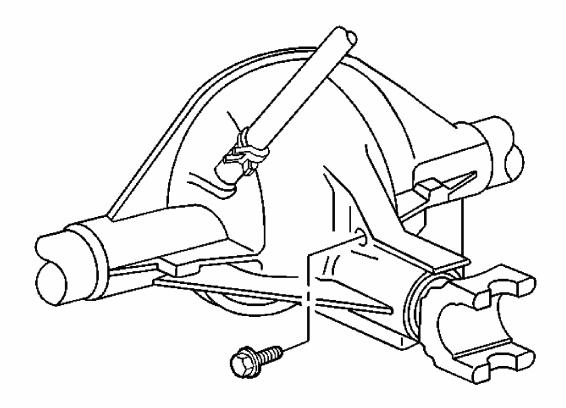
Locating Rear Axle Fill Plug Courtesy of GENERAL MOTORS CORP.
